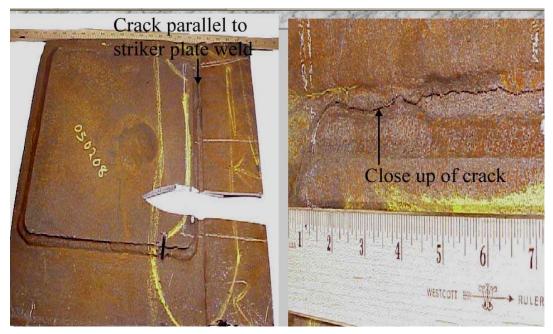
SCC in steel tank bottom. Note crack running parallel to fillet weld in striker plate.
